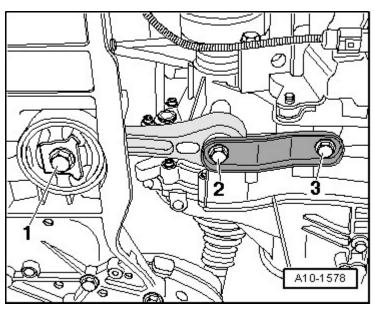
Identifying Pendulum Support & Bolts Courtesy of AUDI OF AMERICA, LLC
